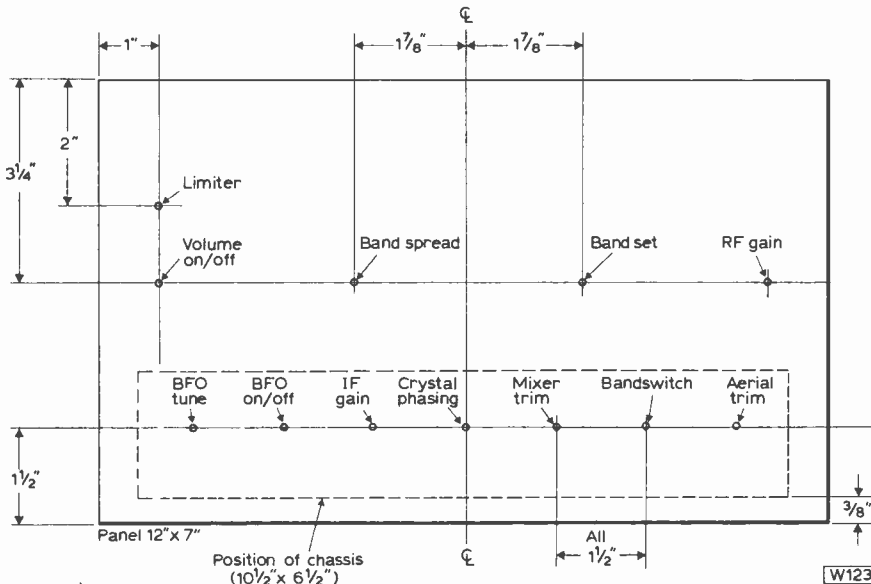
Details for marking out the front panel. Most of the holes will be 1/16in diameter but check with actual components used. It is advisable to drill all the holes from the start even if the optional stages are not added until later. After fitting the chassis to the panel check that they fit into the cabinet properly.
